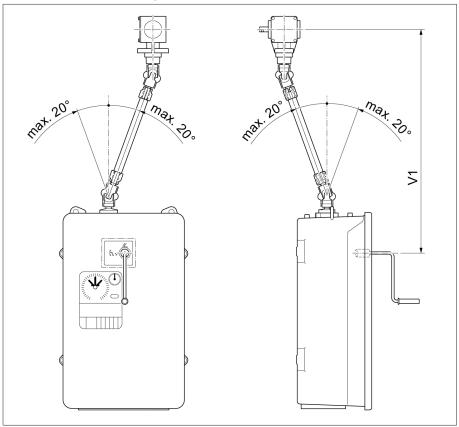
Drive shaft with cardan joints, without insulator (= special model)
